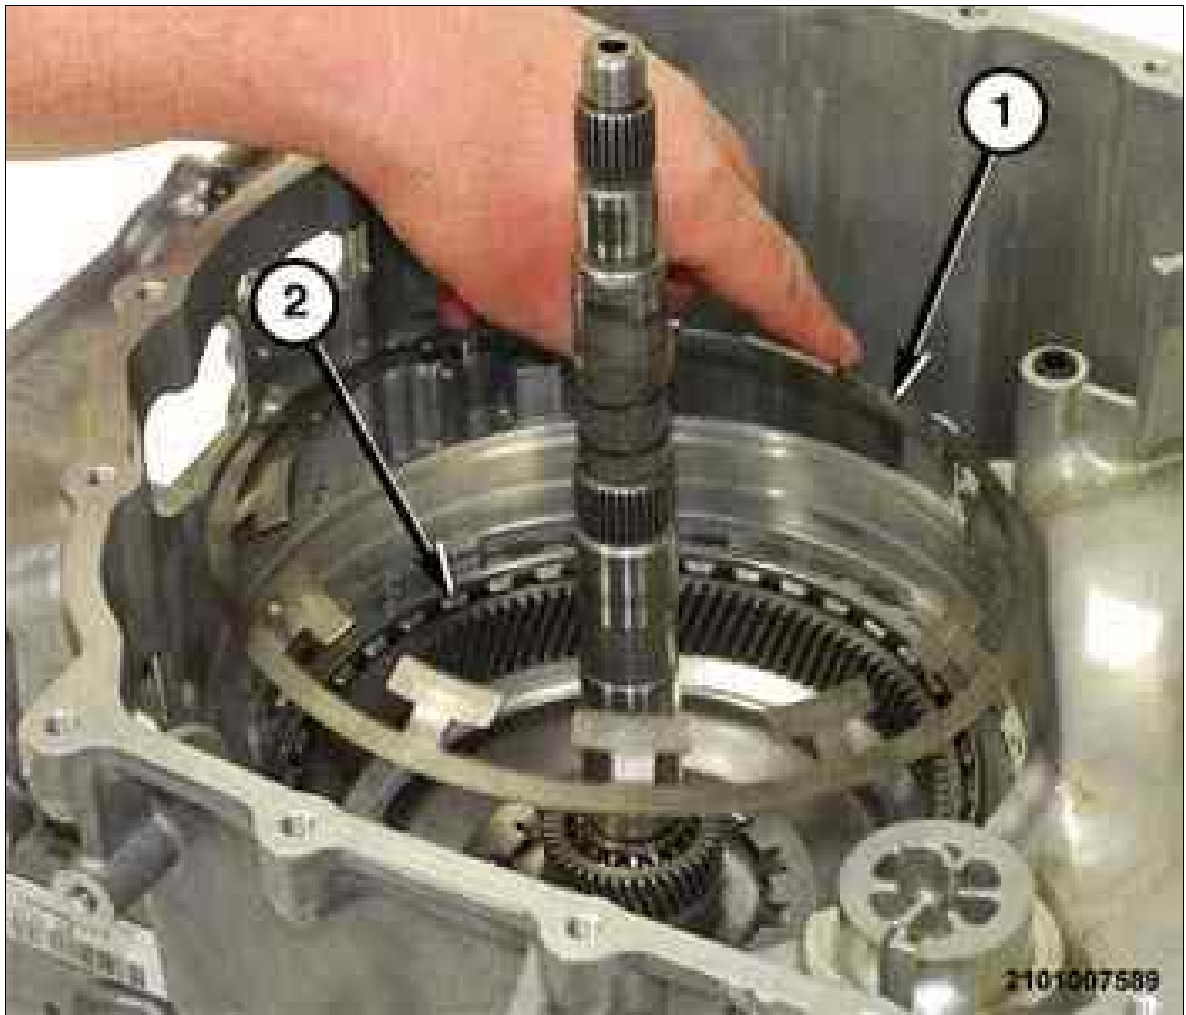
D-Clutch Piston Retainer & O-Ring Seal
